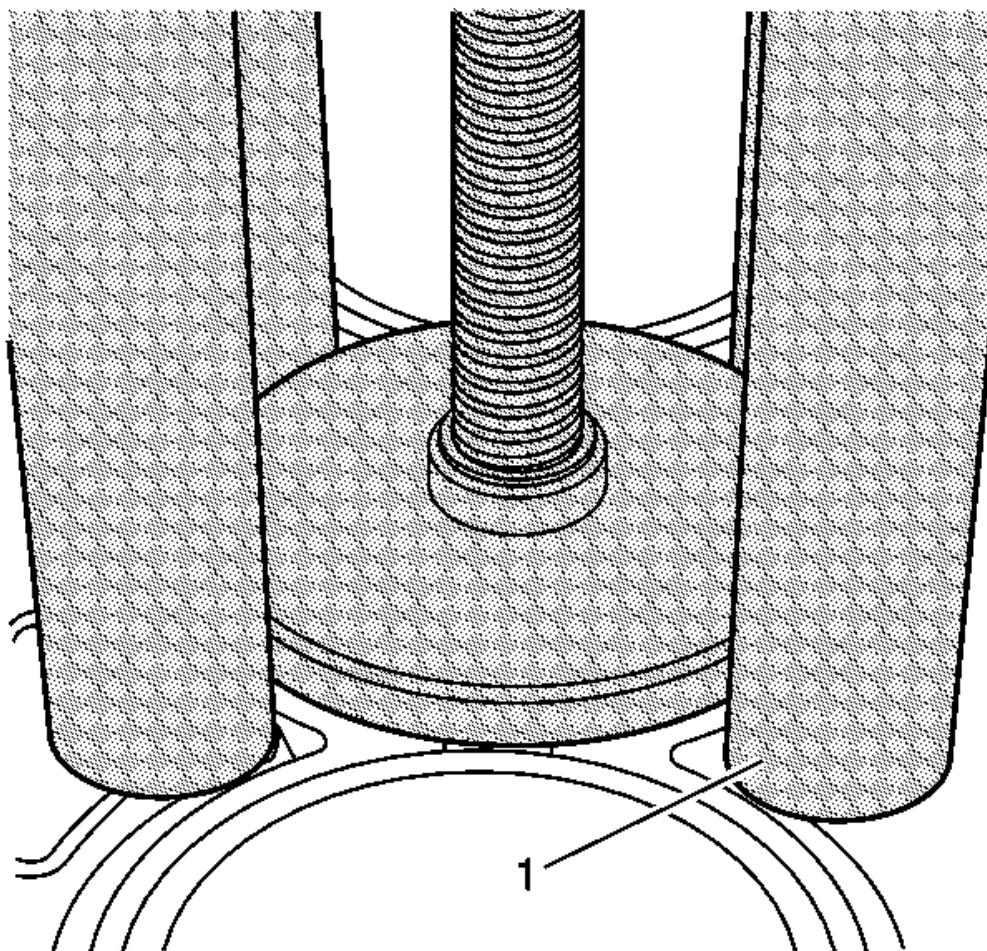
Torque Threaded Shaft Of EN-45680-883 Cylinder Bore Sleeve Installer
